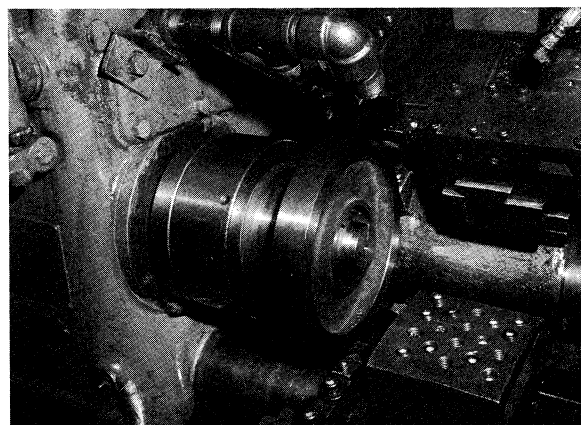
Finish facing and turning operation performed in the green blank before tooth forming and finishing. *Courtesy Clark Equipment Co.
